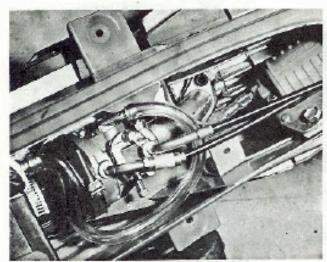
The top cover is removed from the frame. All interior parts are the revealed.
